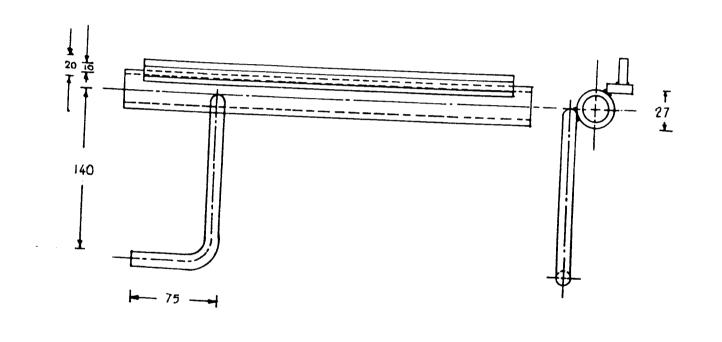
PRESSURE ROLLER ASSEMBLY
